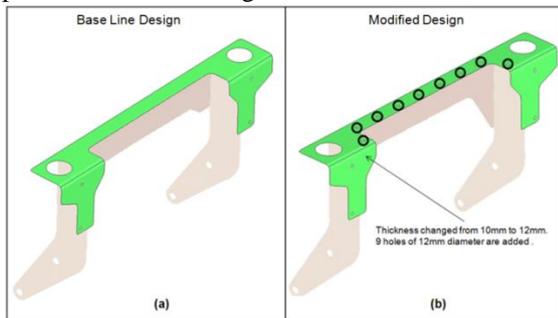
Design Modification - 3 (a) baseline design (b) Modified design
